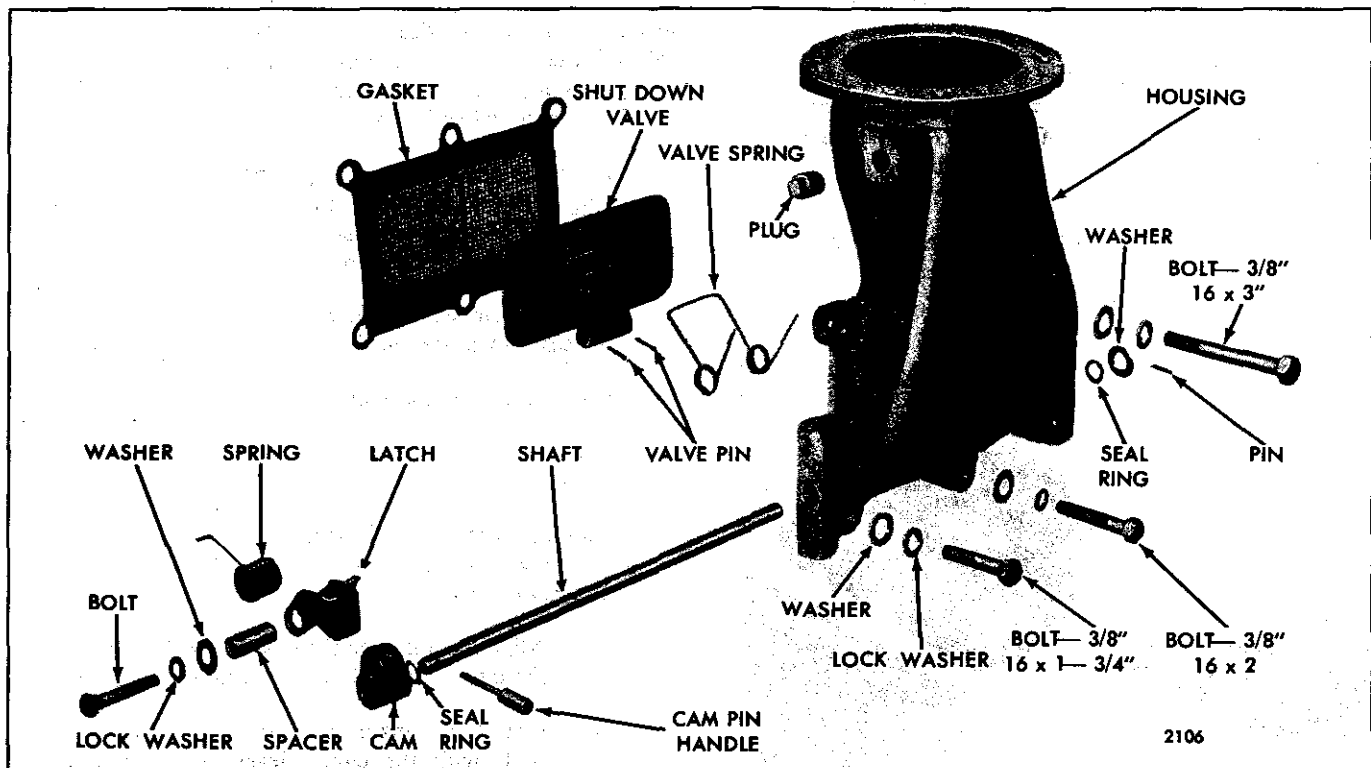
Typical In-Line Engine Air Shutdown Housing Details and Relative Location of Parts
